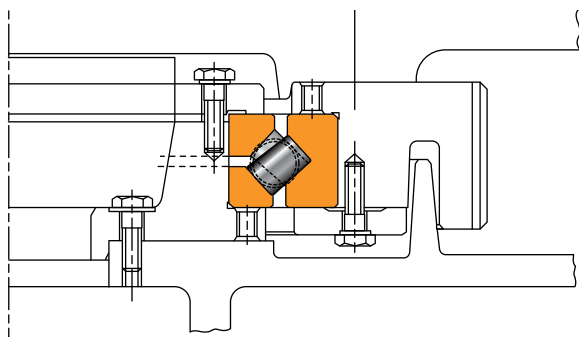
Typical mounting arrangement of a TXRDO bearing.
